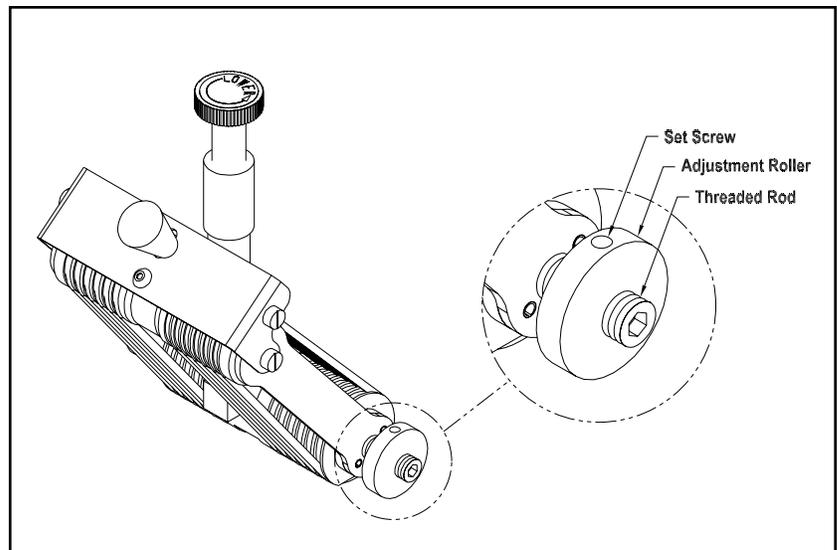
Horizon Adjustment Mechanism (shown on Advancing O-Ring Gate)
